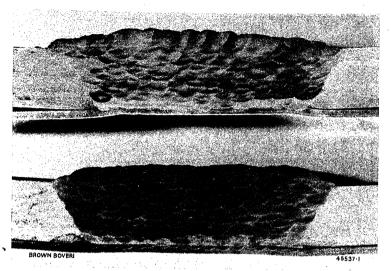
Macro-etching of a welding layer to take specimens from of pure welding material, across direction of the weld. Full size.
